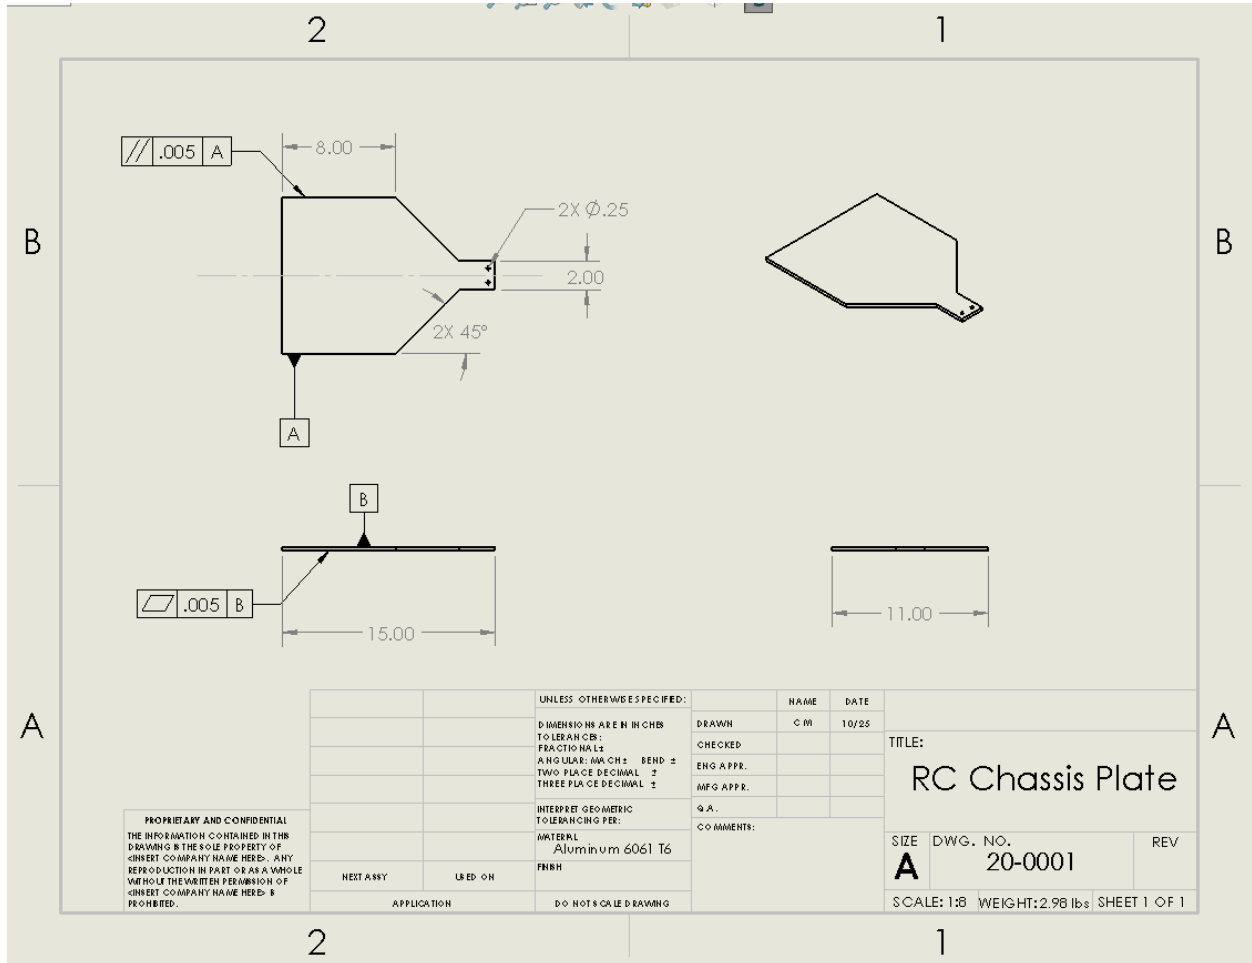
Drawing of Chassis support plate with front mounting holes.
